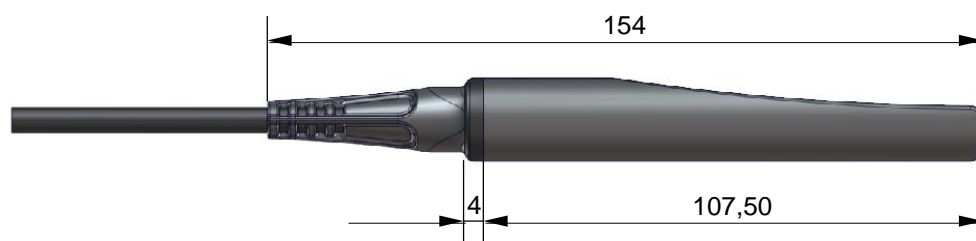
Dimensioner/Dimensionen/Dimensions Dimensiones (mm)
